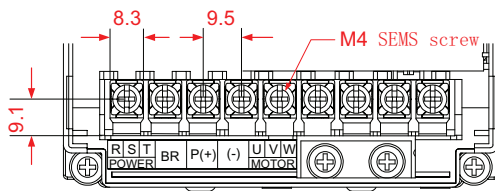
Wiring terminal dimensions for models of 2.2 kW and below (unit: mm)
